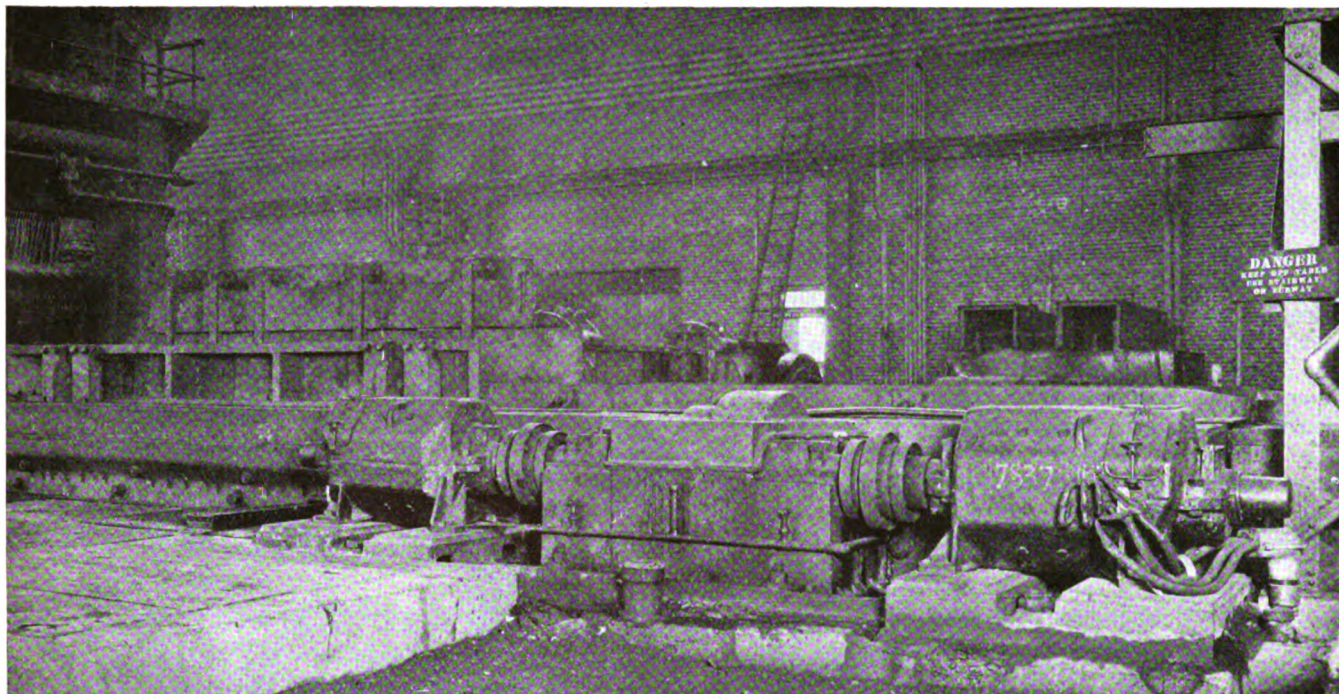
Flexible couplings are widely used on steel mill auxiliary drives. Laminated disk couplings are used to connect the motors to the drive.
